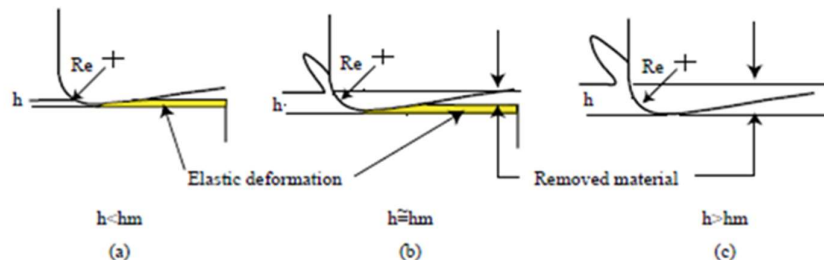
Schematic of the effect of the minimum chip thickness (Re , radius of cutting tool; h , undeformed chip thickness; hm , minimum chip thickness) [2].
